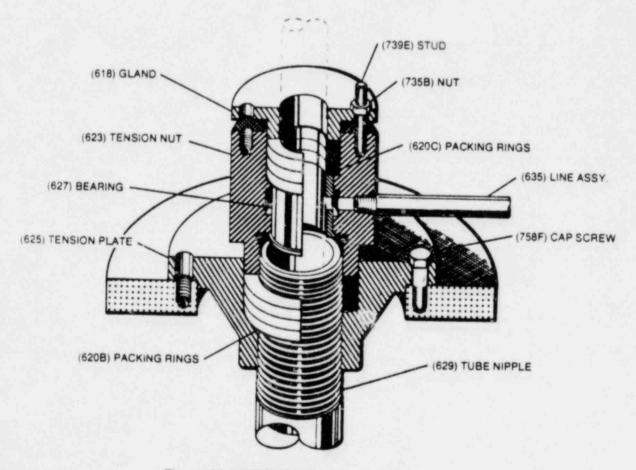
A-8 TENSION PLATE ASSEMBLY (FLUSH LUBRICATION)
